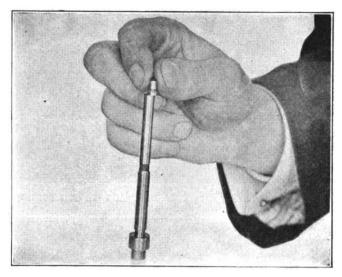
ANVIL AND SPINDLE END WRUNG TOGETHER
